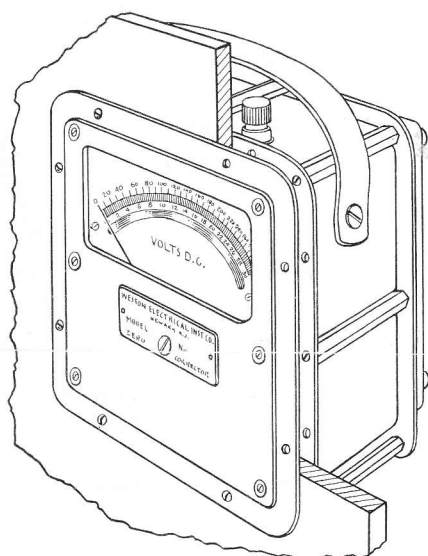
The instrument is clamped between two metal flanges and mounted in the panel with a third flange.
